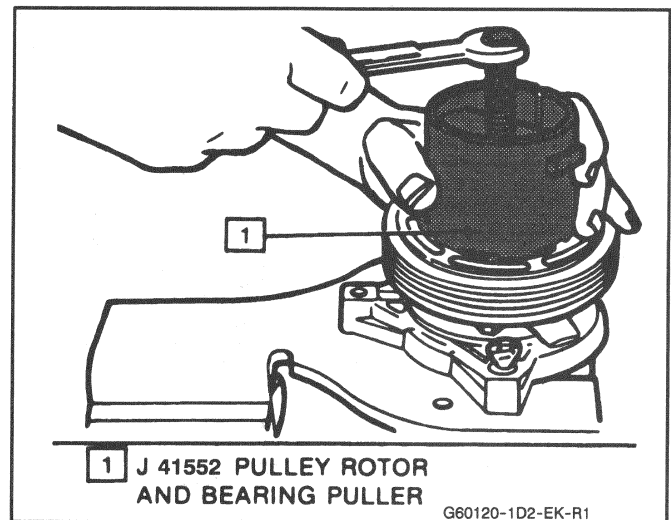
Removing Pulley Rotor and Bearing Assembly
